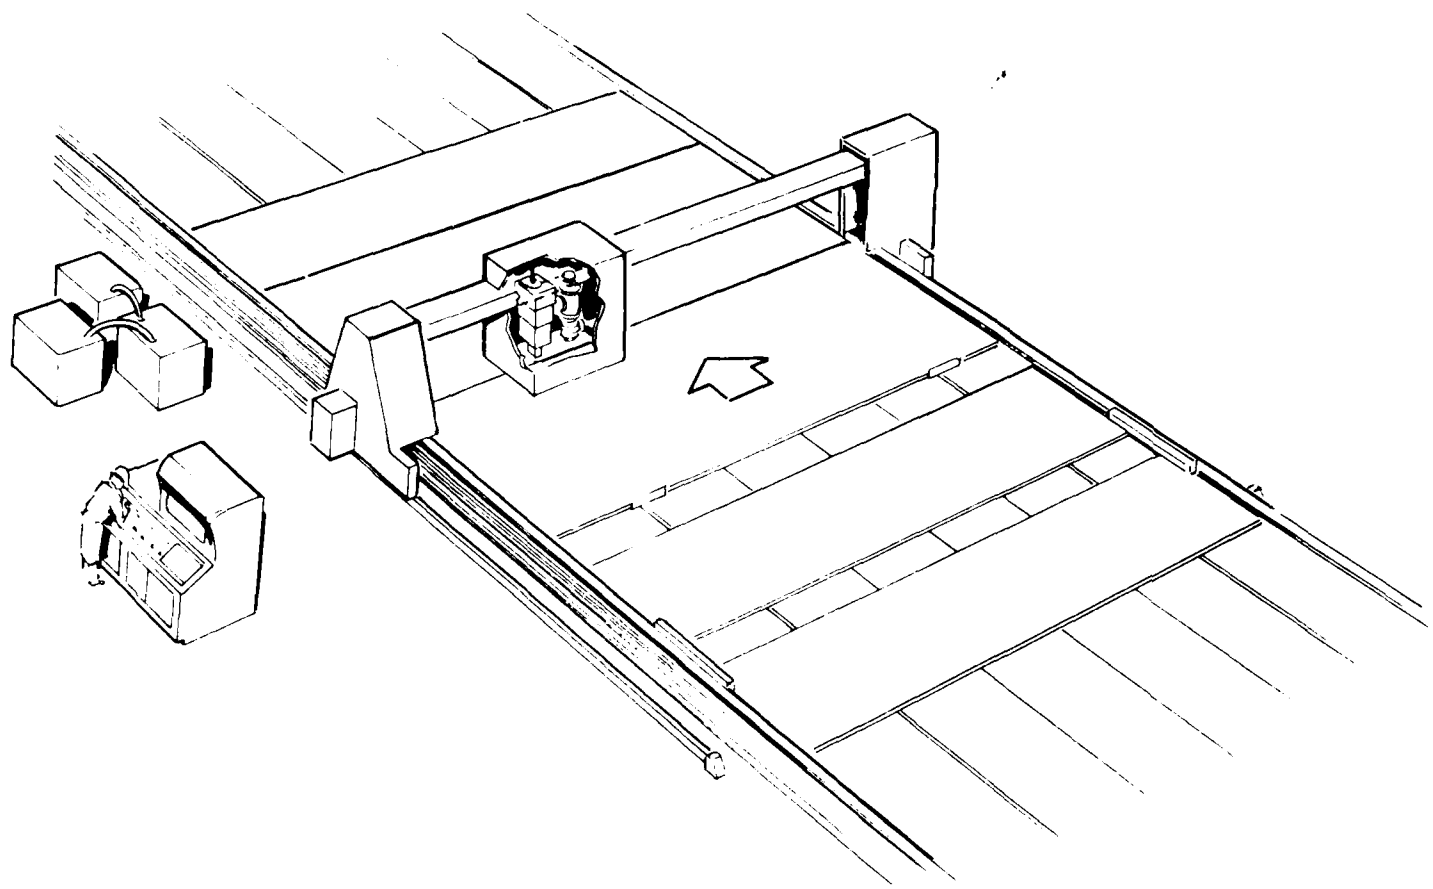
NON-VACUUM EB WELDING
